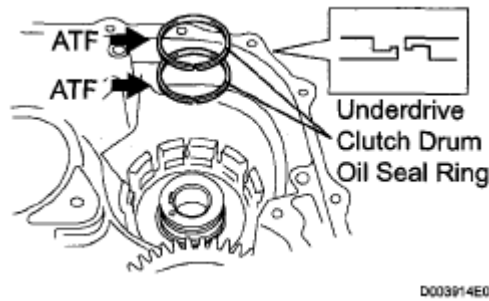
Identifying Underdrive Clutch Drum Oil Seal Ring
